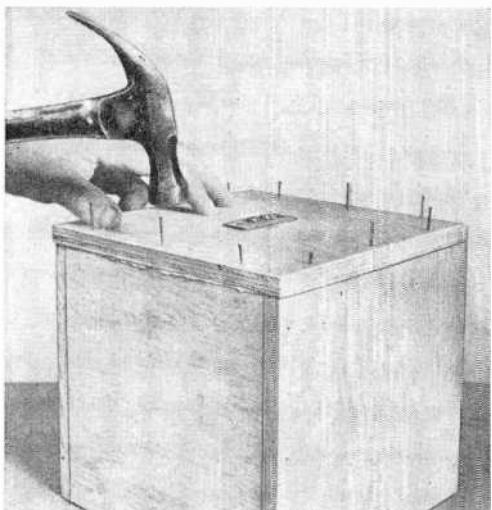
Mount screw-type terminal strip to rear of cabinet; then glue and nail rear wall to cabinet shell, trueing up sides, top, and bottom as you go.
